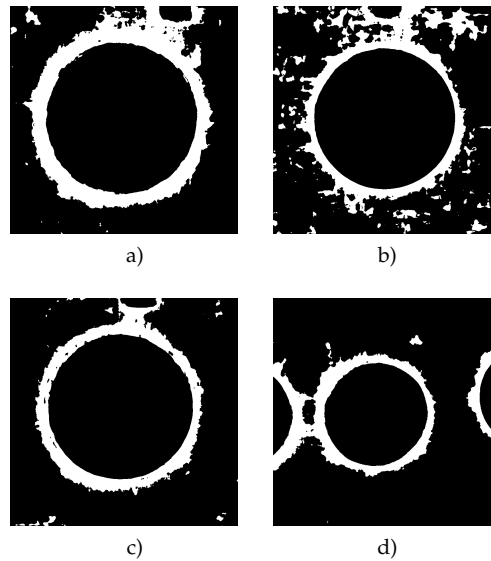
Discarded tests: a) Twist drill test V04; b) Twist drill test V12; c) Twist drill test V28; d) Straight Flute drill test V02.
